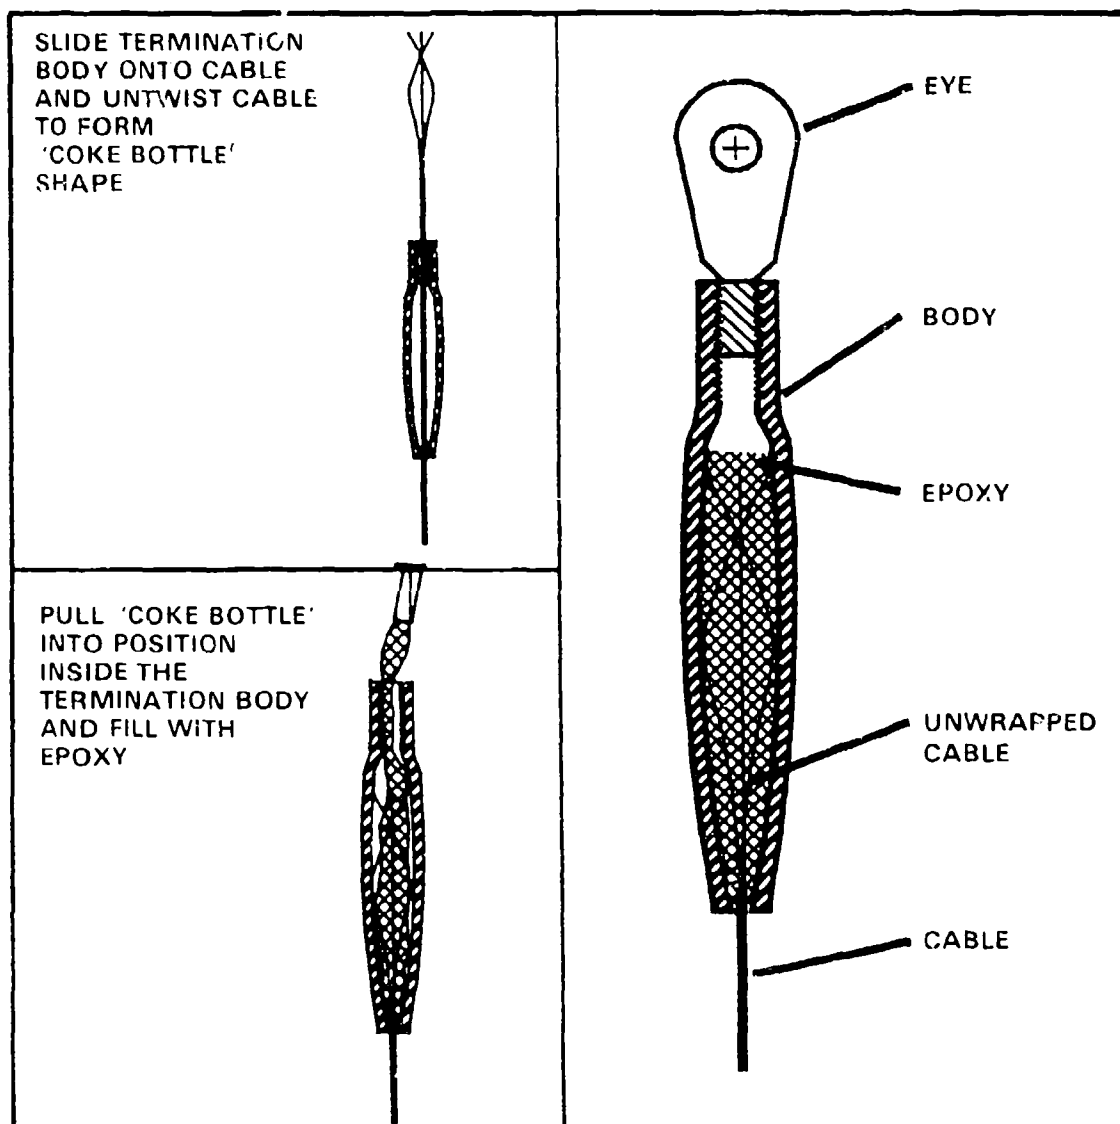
GENERAL EPOXY-RESIN TERMINATION INSTALLATION
